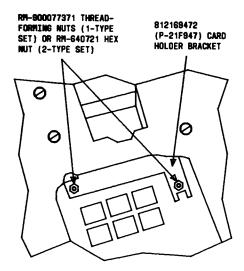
Card Holder Bracket Installed (TOUCH-TONE Set)
